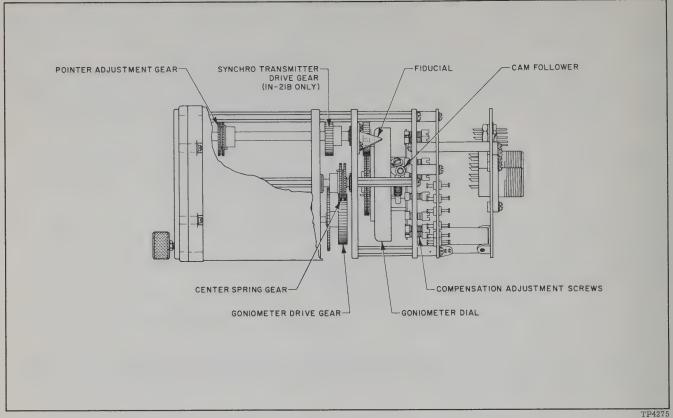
IN-21B and IN-21C Goniometer-Indicator, Alignment Points
